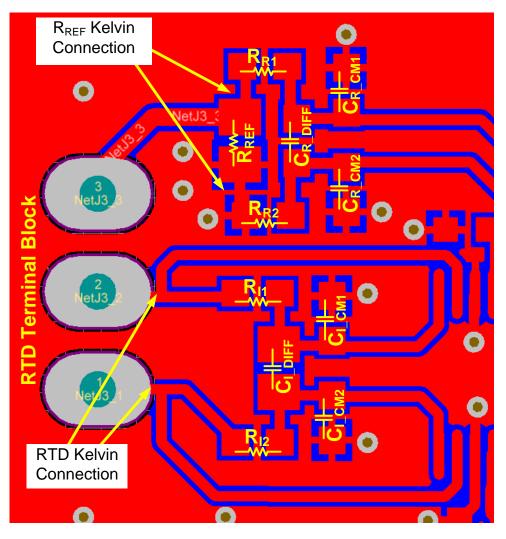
PCB Layout Highlighting Important PCB Layout Concerns
